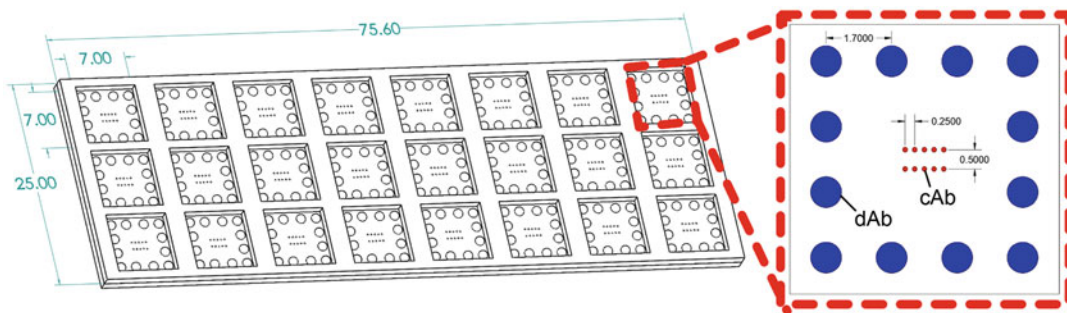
(Left) Schematic of the D4 after Ab printing and assembly with important dimensions. (Right) Close up of one D4 assay with Ab spacing for dAb (blue) and cAb (red). Dimensions in mm
